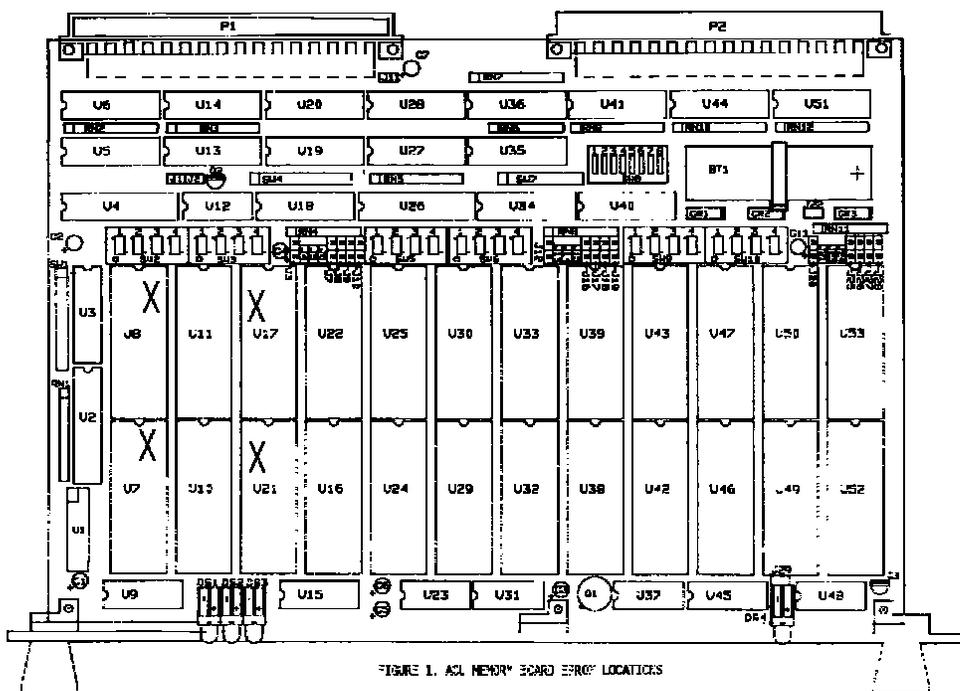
AGL MEMORY BOARD ERROR LOCATIONS
